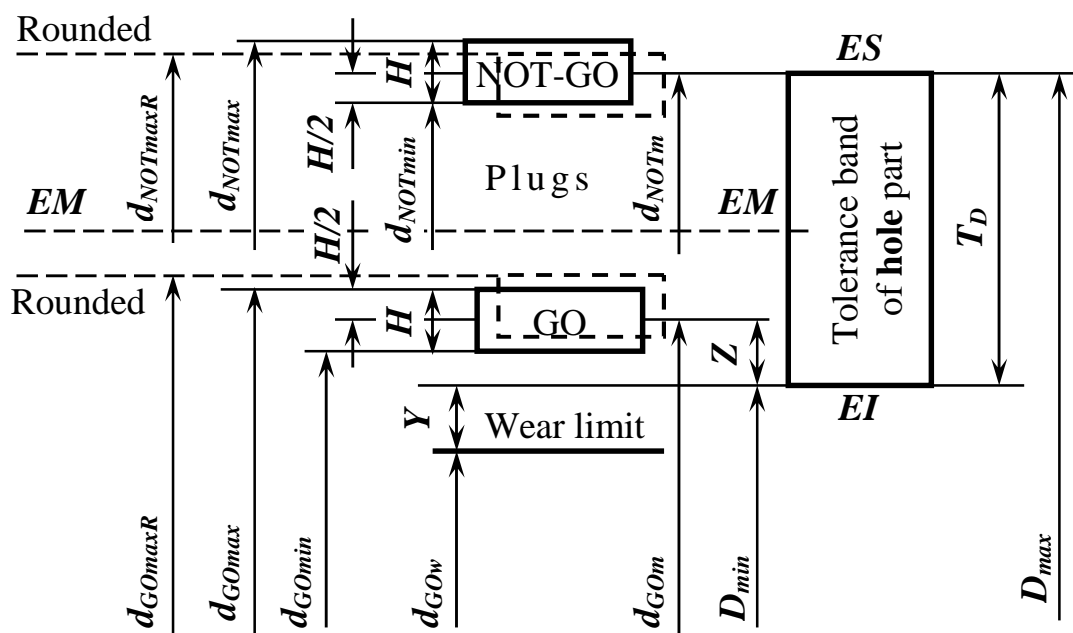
Diagram for calculations of dimensions of work plug gauges for check of hole part
